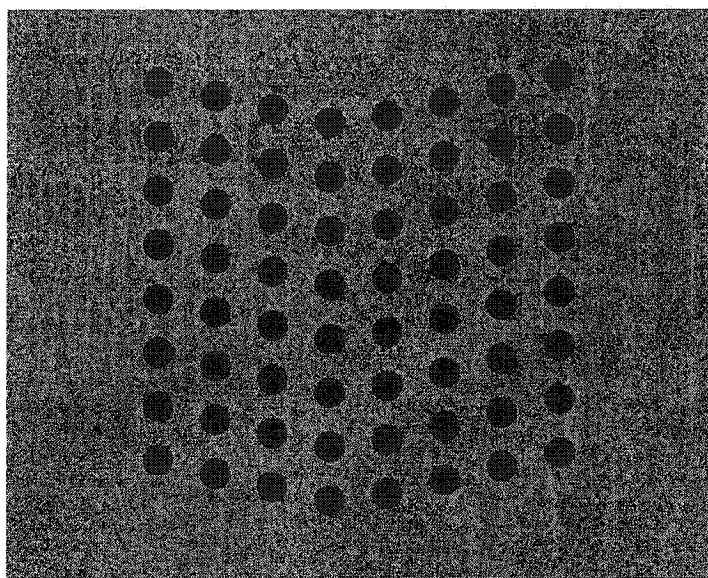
Electrode pad positions printed onto Cu foil using a bubble-jet printer
